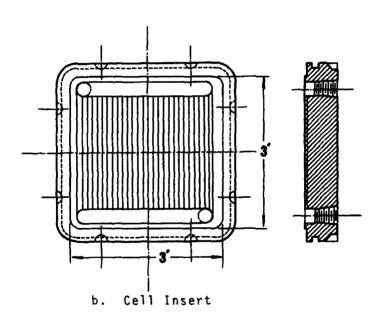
3 x 3 in. Full Cell Test Fixture.
